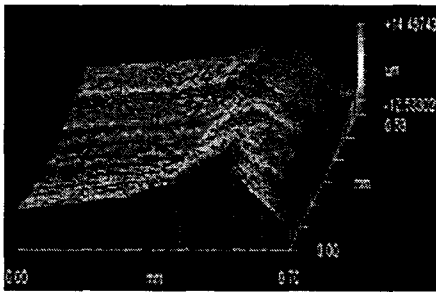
Machined surface profile for 3-dimensional sculptured surface machining
